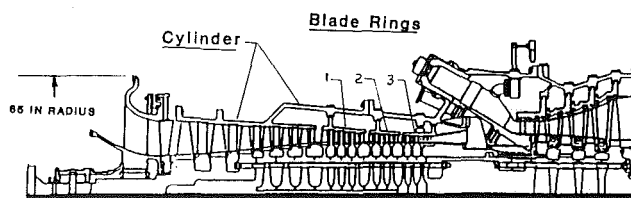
501F compressor cylinder and blade ring assembly configuration
